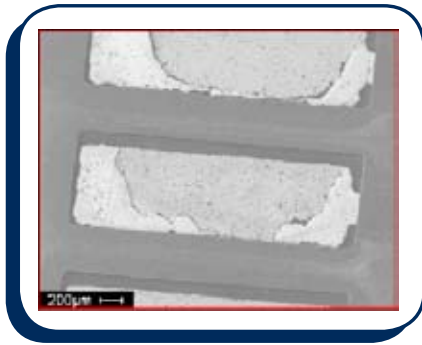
Solder joint fracture and SEM/EDS analysis
